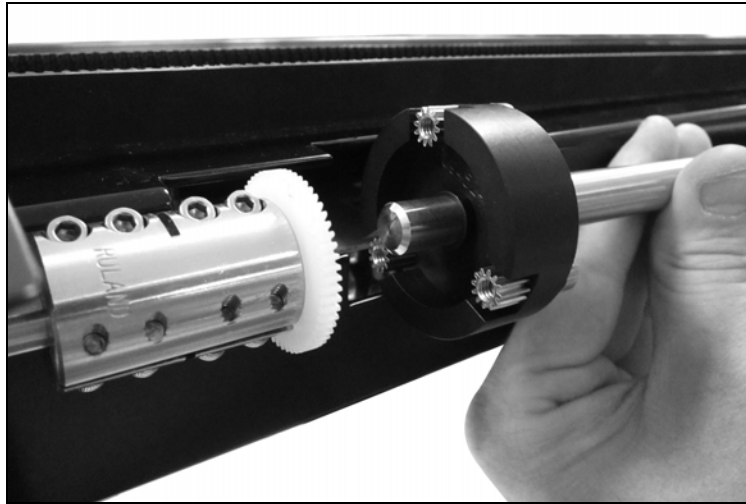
Mate the teeth of the plastic gear to the coupler adjustment ring.
